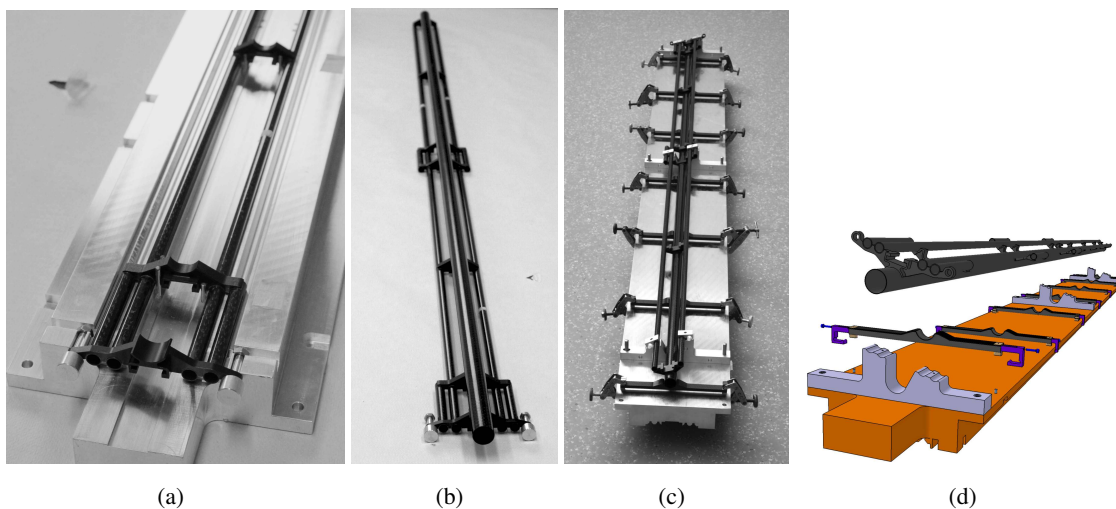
(a) Top side of aluminium LS assembly jig, machined using AW5083 cast aluminium, before placement of the central CFRP support tube. (b) Photograph of the assembled LS, after attaching the CFRP support tube but before attaching the wings. (c) Bottom side of the jig used for wing assembly including 3 aluminium blocks that determine the azimuthal tilt angle when attached to the barrel support. (d) Schematic 3D CAD drawing of (c).
